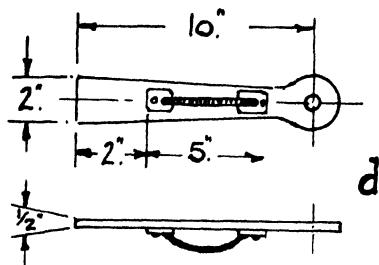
DETAIL OF MILD-STEEL LATCH FOR MOULD BOX
